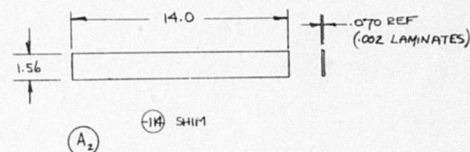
Pultruded Tail Rotor Spar Test Mounting Fixture.
